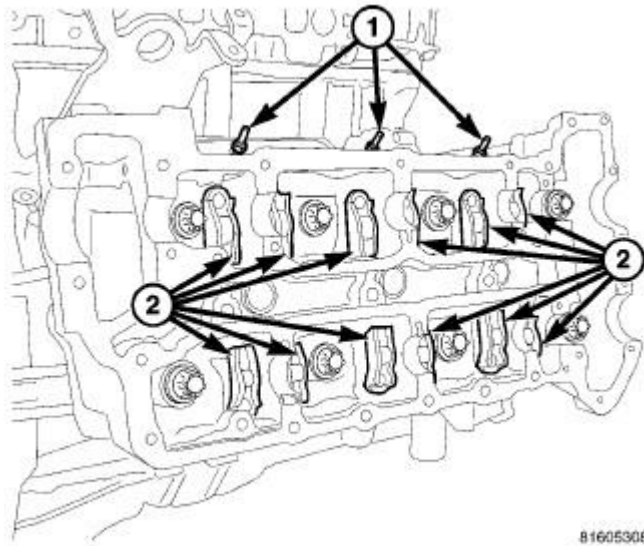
RIGHT TAPPET/CAMSHAFT FOLLOWER POSITION
